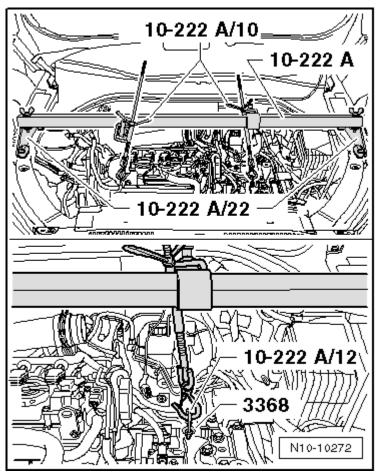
Identifying Engine Support Bridge 10-222 A And Special Tools
